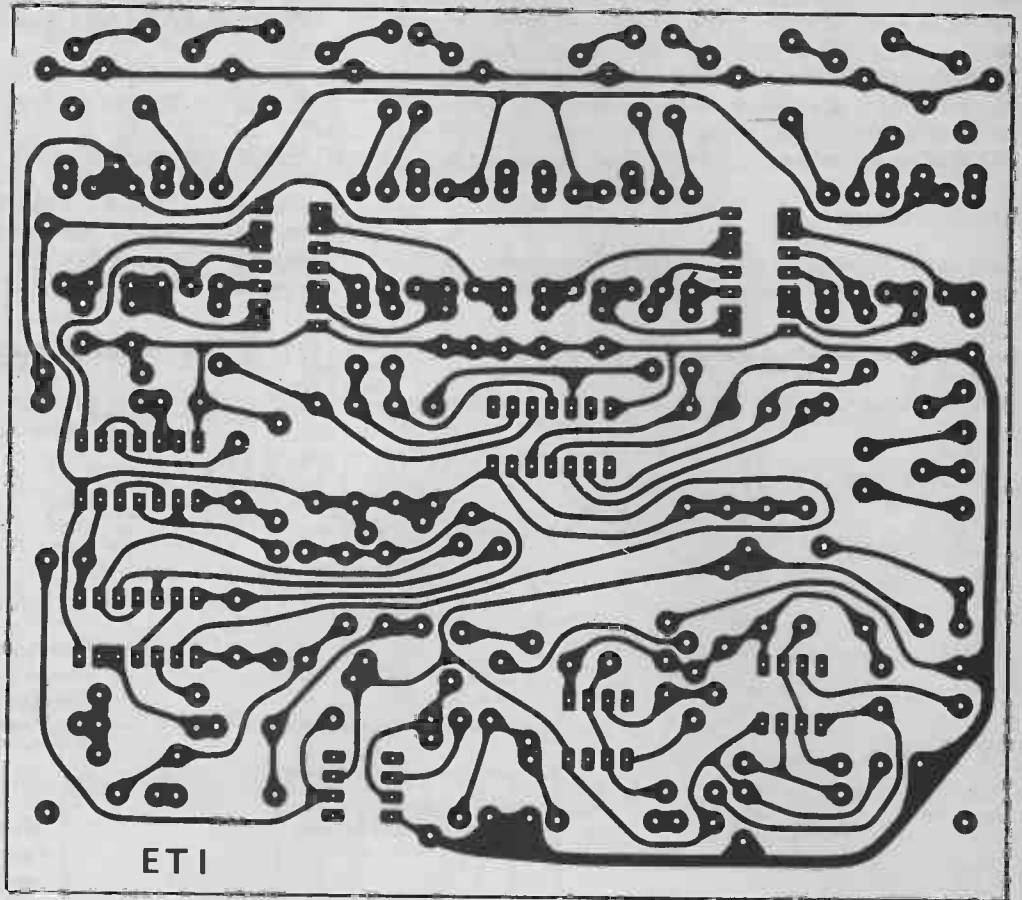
PCB foil pattern of 'A' board shown full size (130 x 115mm).
